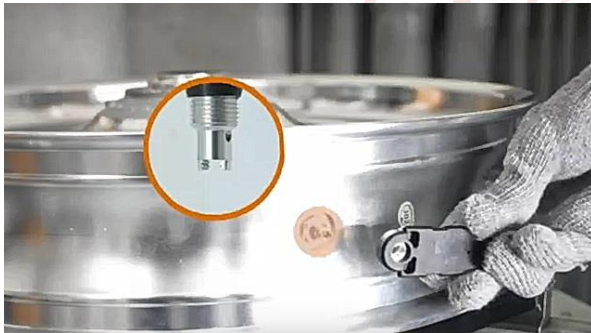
Insert the L-type valve on the valve hole of the rim, face outward and be perpendicular to the rim.
